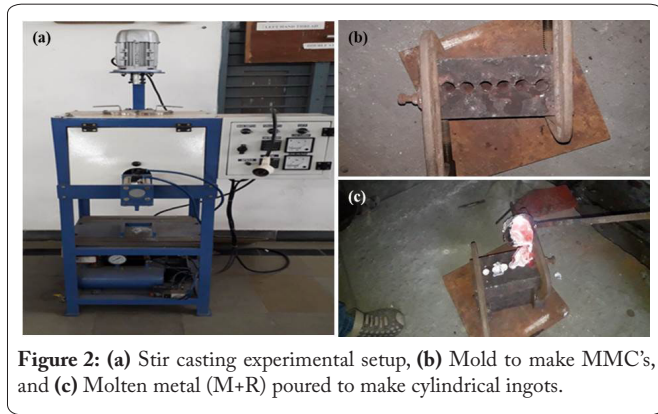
(a) Stir casting experimental setup, (b) Mold to make MMC's, and (c) Molten metal (M+R) poured to make cylindrical ingots.
